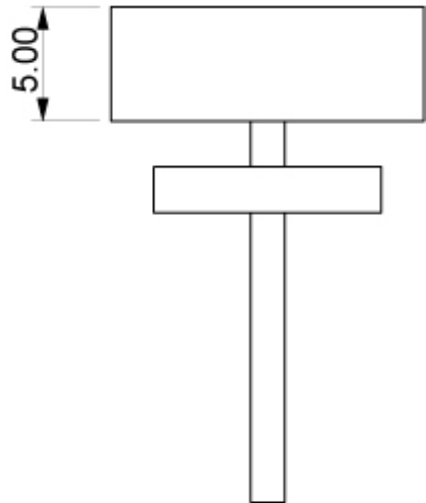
Design for the fabrication of specimen by centrifugal casting (Scales are in mm).
